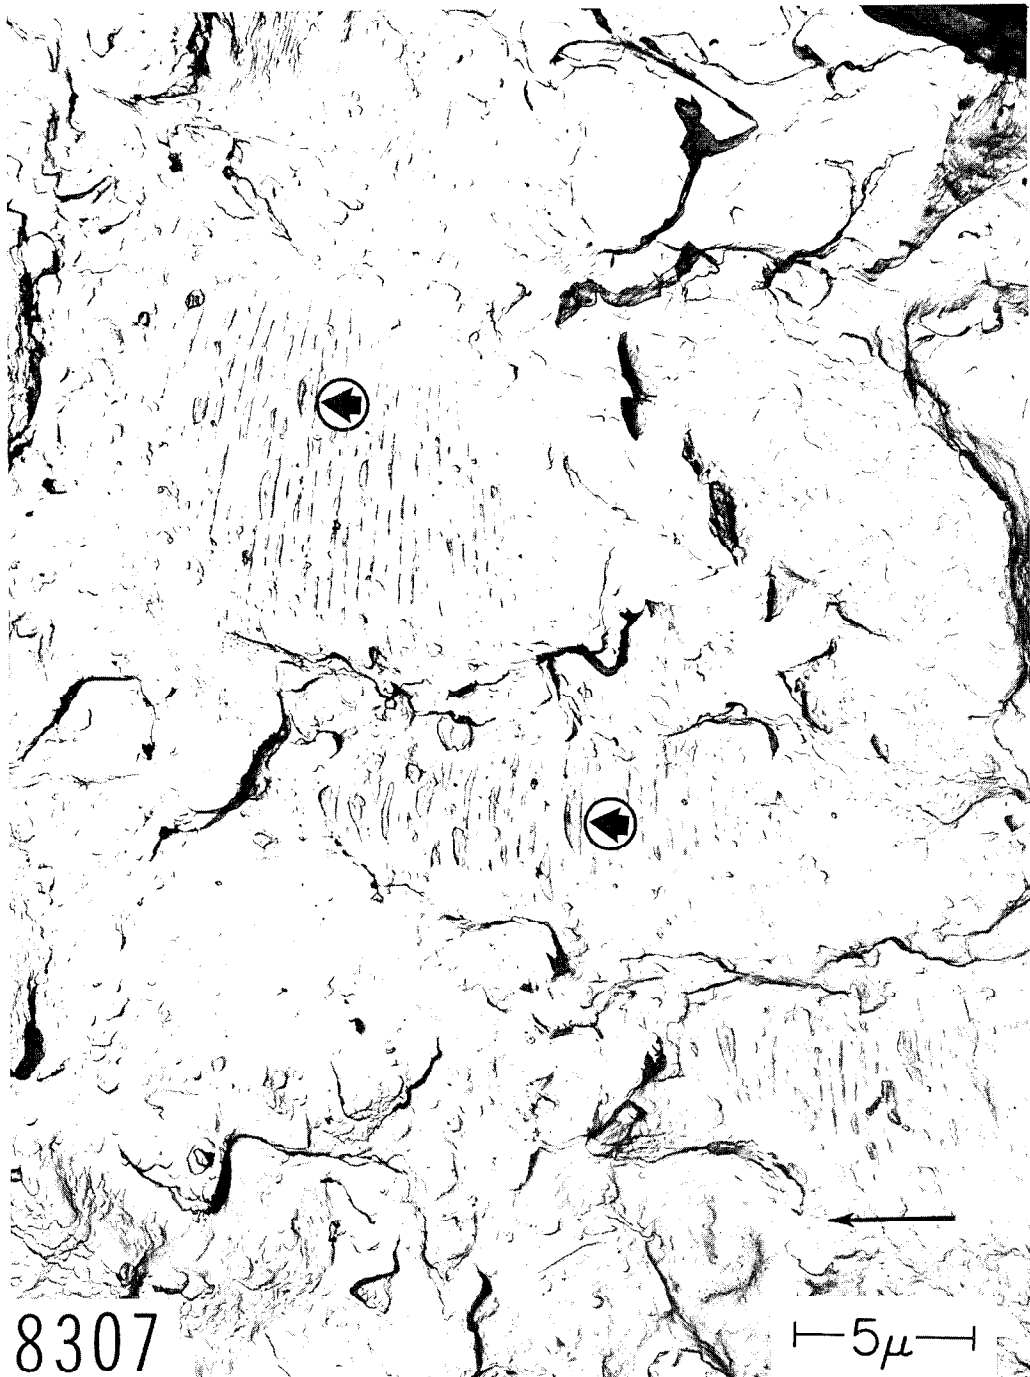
Tension-tension plane-strain fatigue markings in an RW fatigue crack in 2020 T651 aluminum alloy. Arrows indicate tongue-shaped cracks along parts of some of the striations. Cellulose acetate-carbon replication technique. Palladium shadowed. 6000X.
